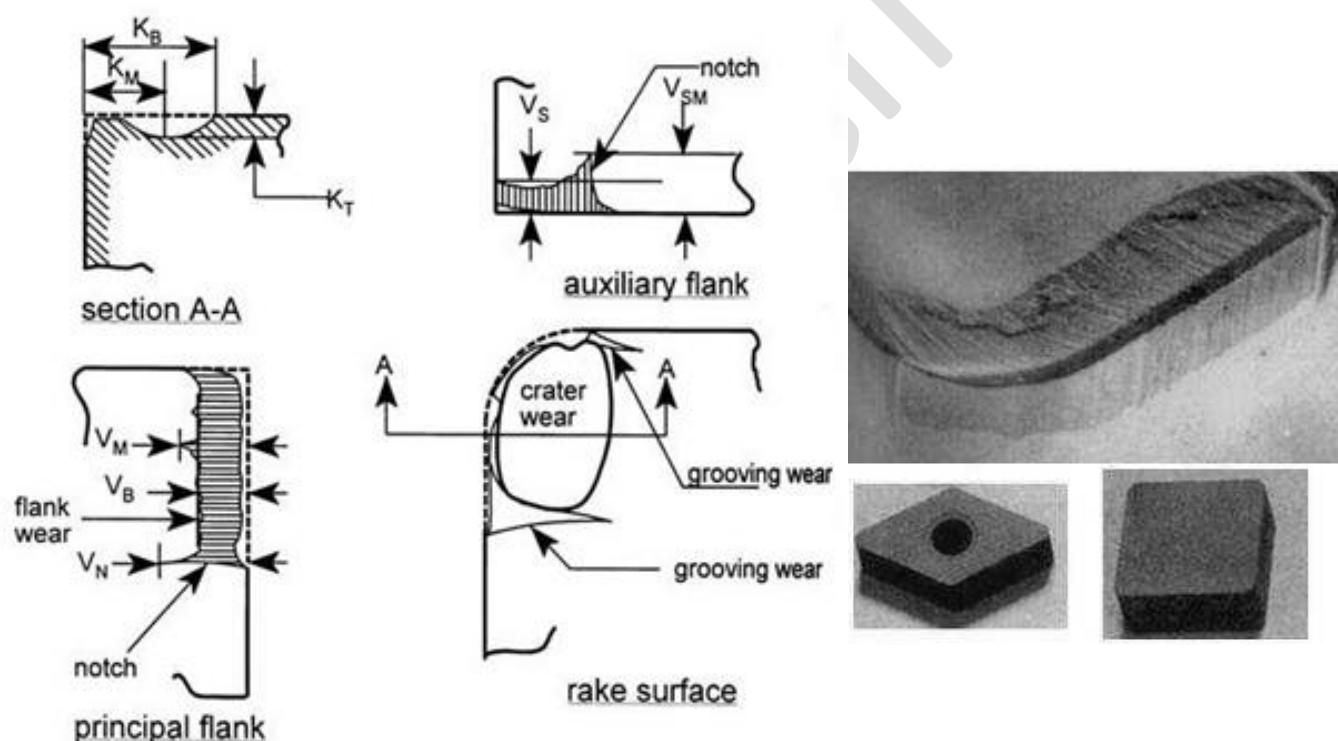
(b) Geometry and major features of wear of turning tools
